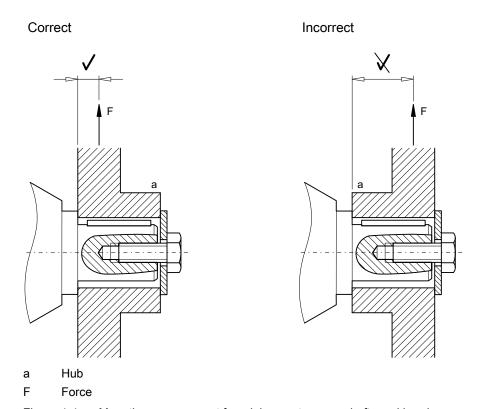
Mounting arrangement for minimum stress on shafts and bearings
